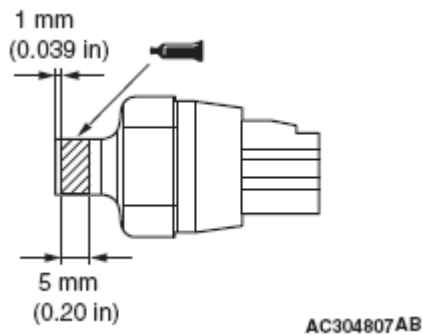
Applying Sealant To Thread Of Engine Oil Pressure Switch
